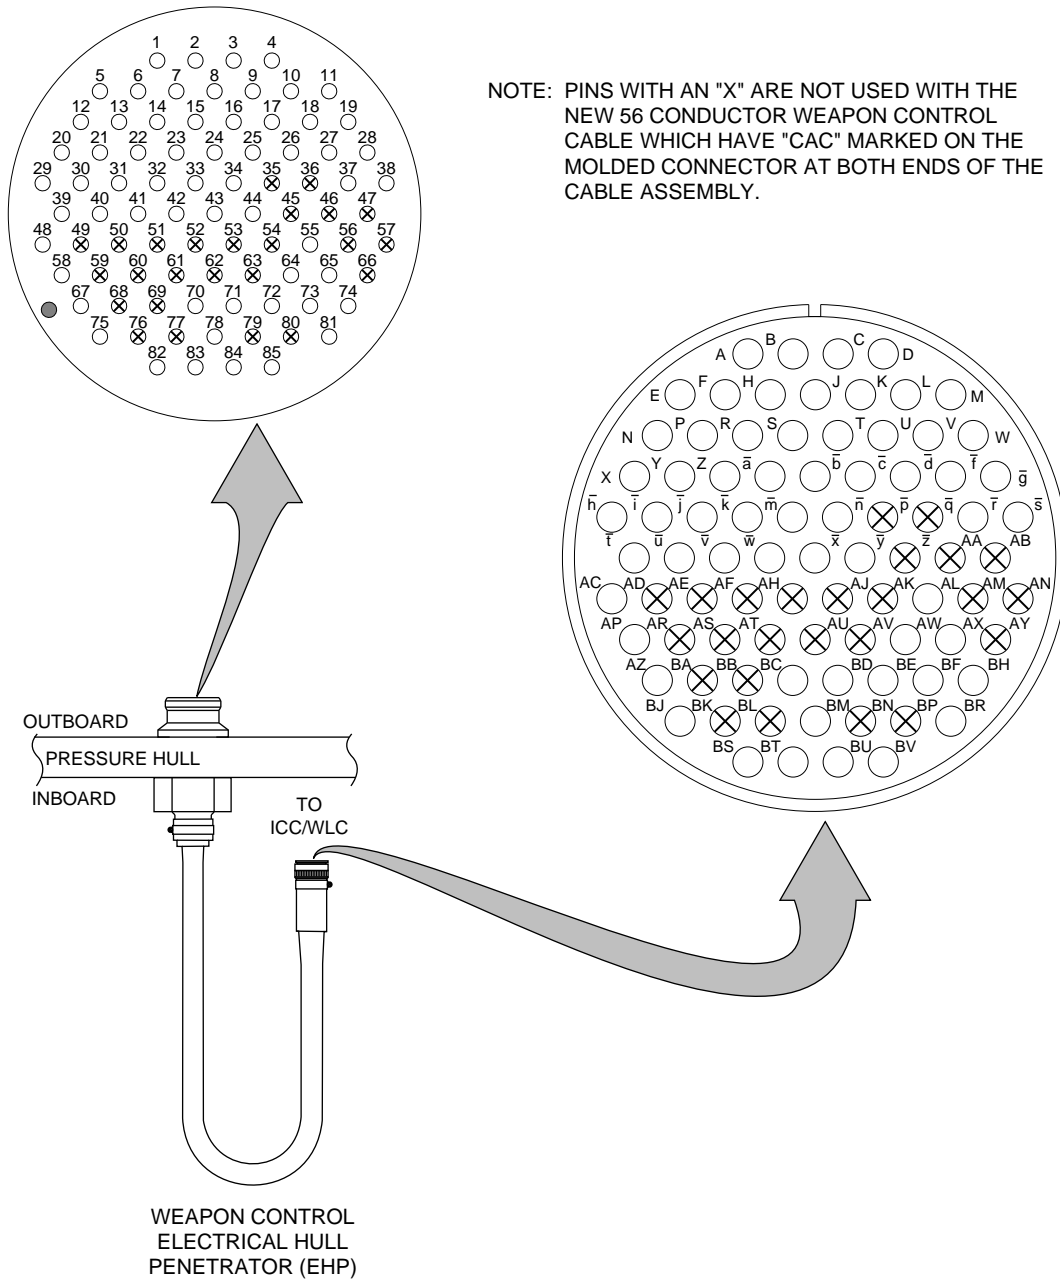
Electrical Hull Penetrator Pin Arrangement
